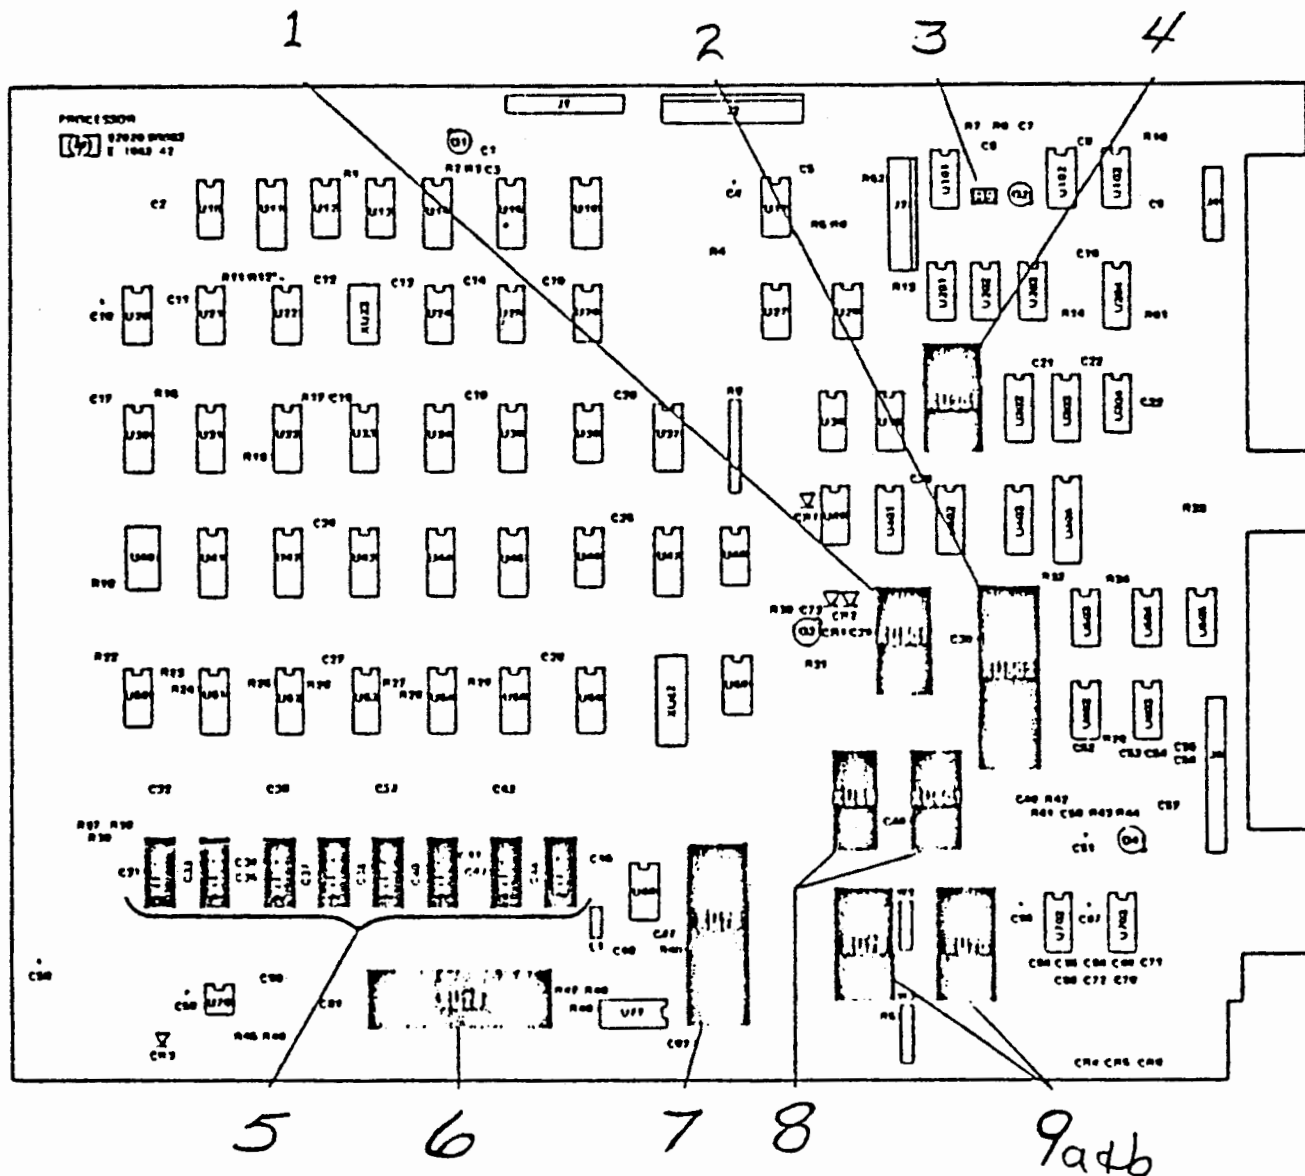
is an illustration of socketed components on the processor PCA. Fill in the blanks below using figure 5 as reference for numerical meanings.
